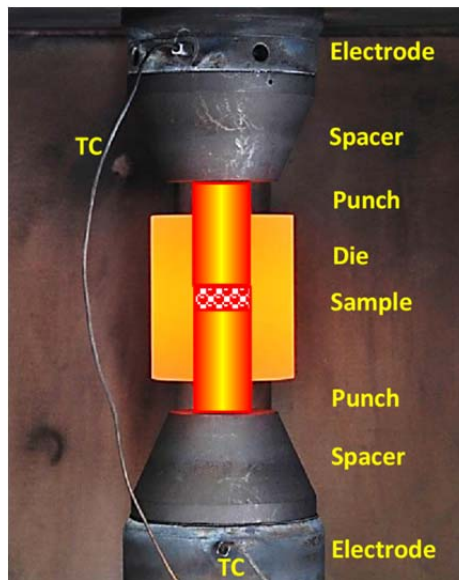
Components of FAST/SPS tool setup and two thermocouples (TC) for measurement of electrodes temperature.
